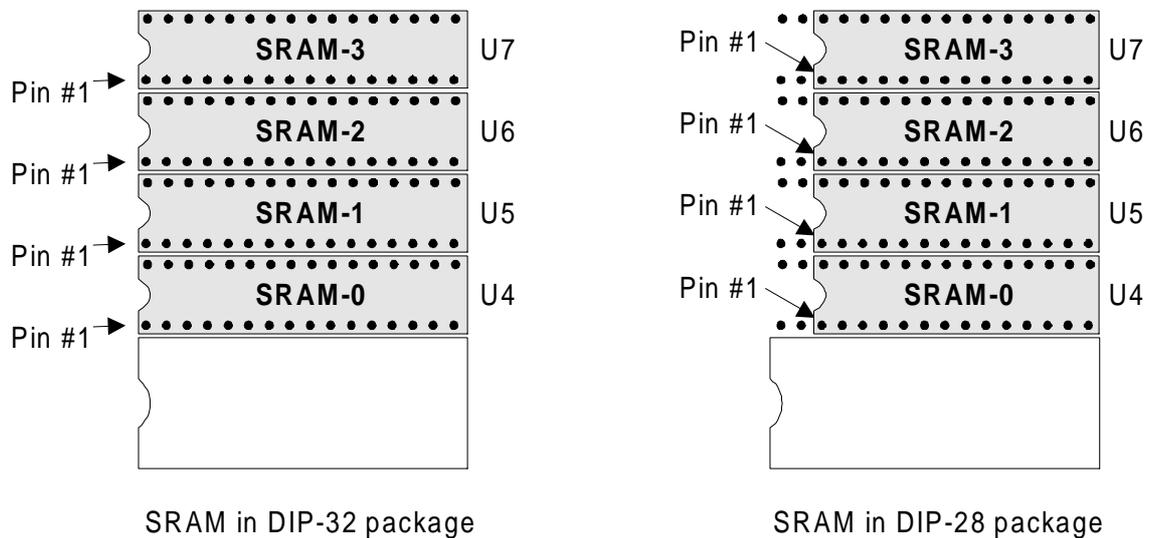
Installation of SRAM chips onto *TORNADO-E31* board.
